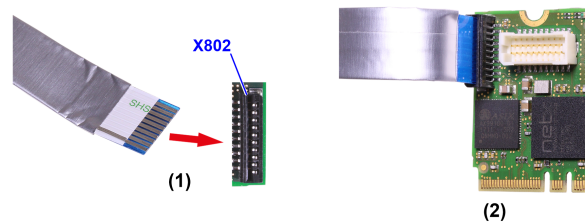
Connecting cable to the basic card, example CIFX M223090AE
